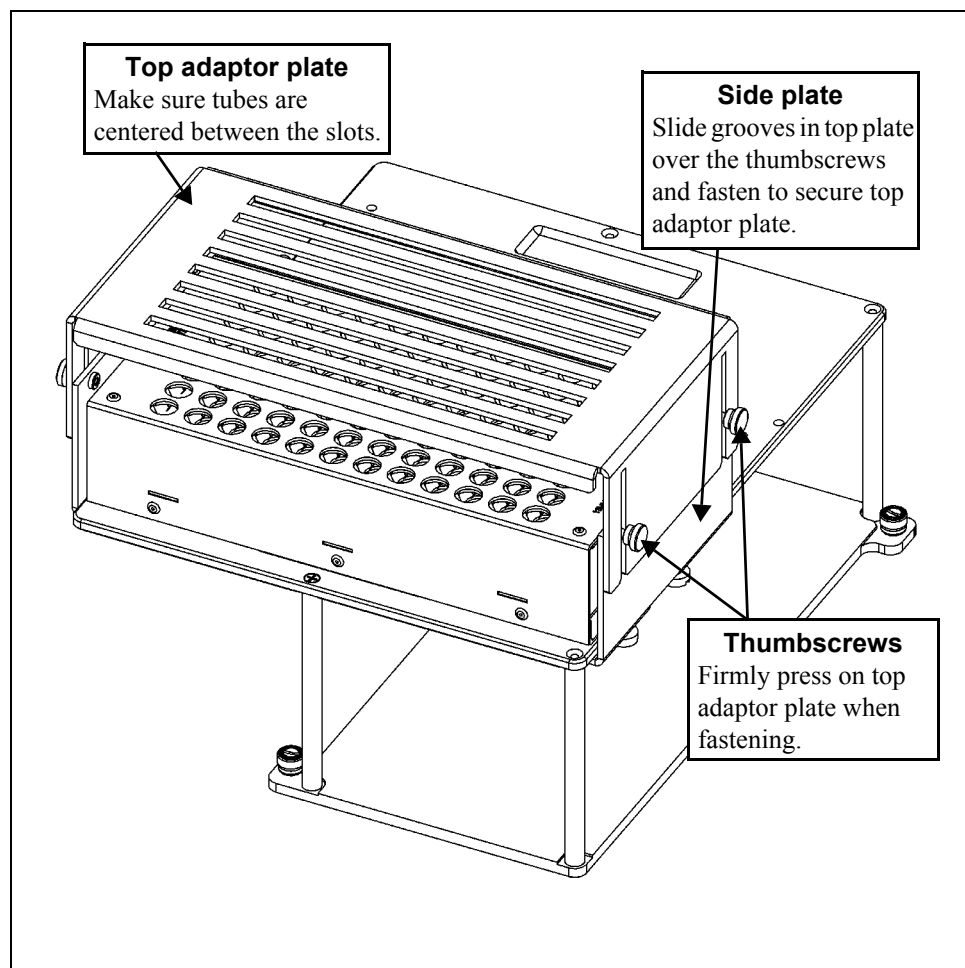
Septum Piercing Tube Rack with top adapter plate (left facing)
